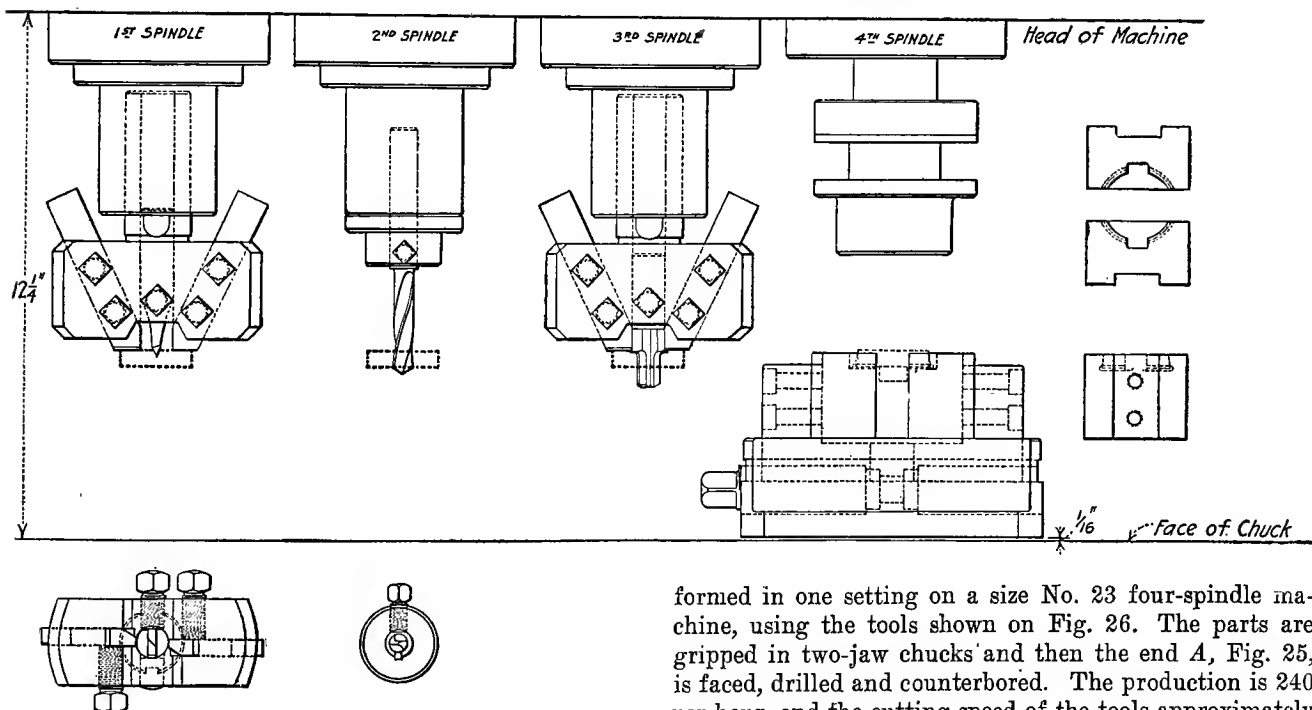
TOOLING FOR MACHINING TIME-FUSE RINGS
